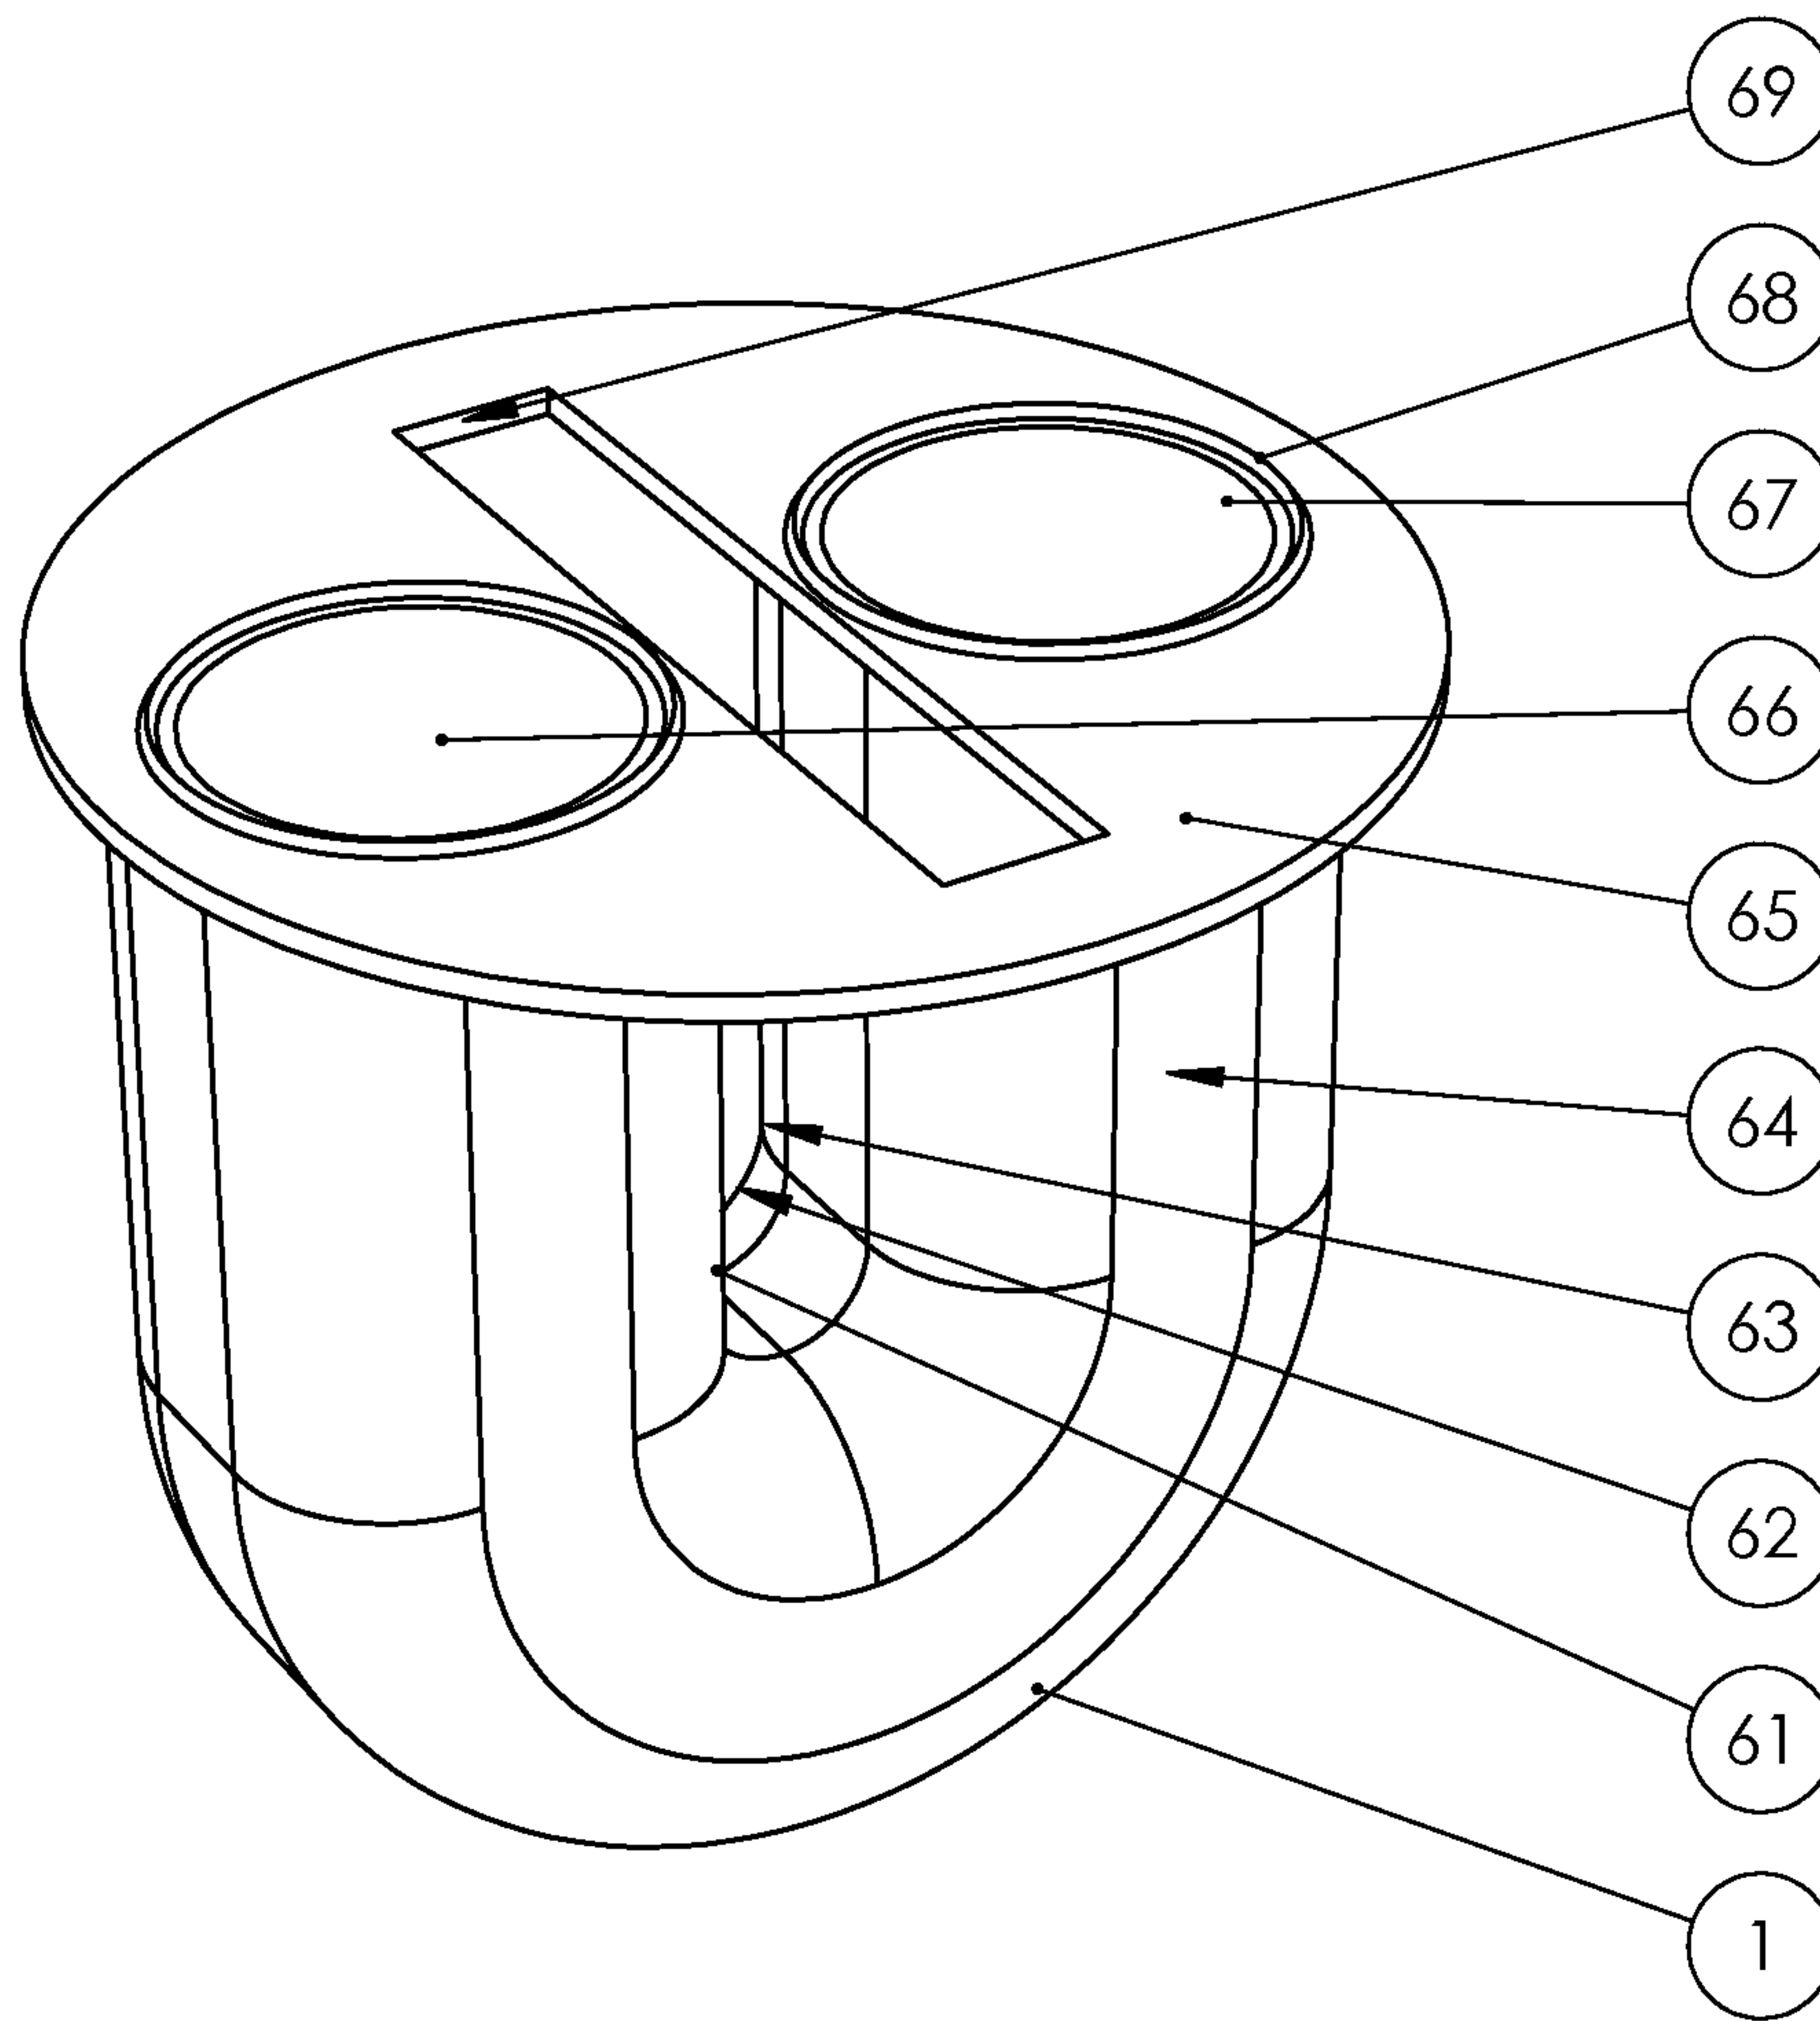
Isometric view of the removable U-bend trap cartridge.
